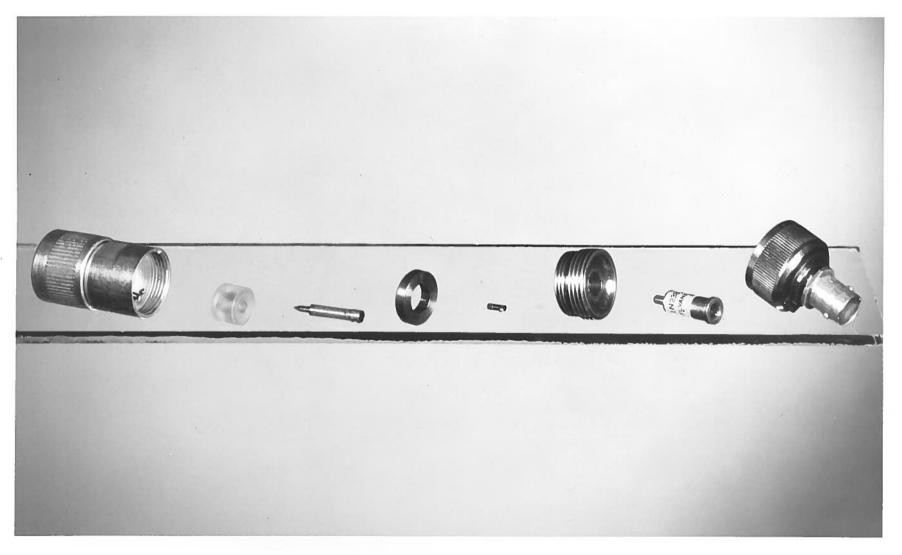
BROADBAND COAXIAL CRYSTAL MOUNT Exploded View
